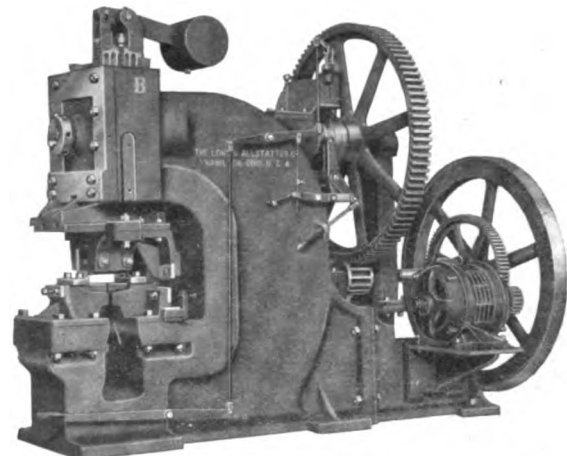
No. B I Beam Punch and Coping Machine Equipped with Coping Tools
